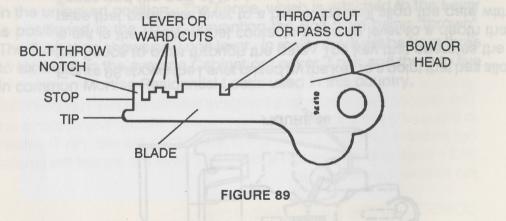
is an illustration of a Flat Steel key used with Lever Tumbler Cabinet and Locker Locks. This same type key is sometimes used for small simple warded locks.
